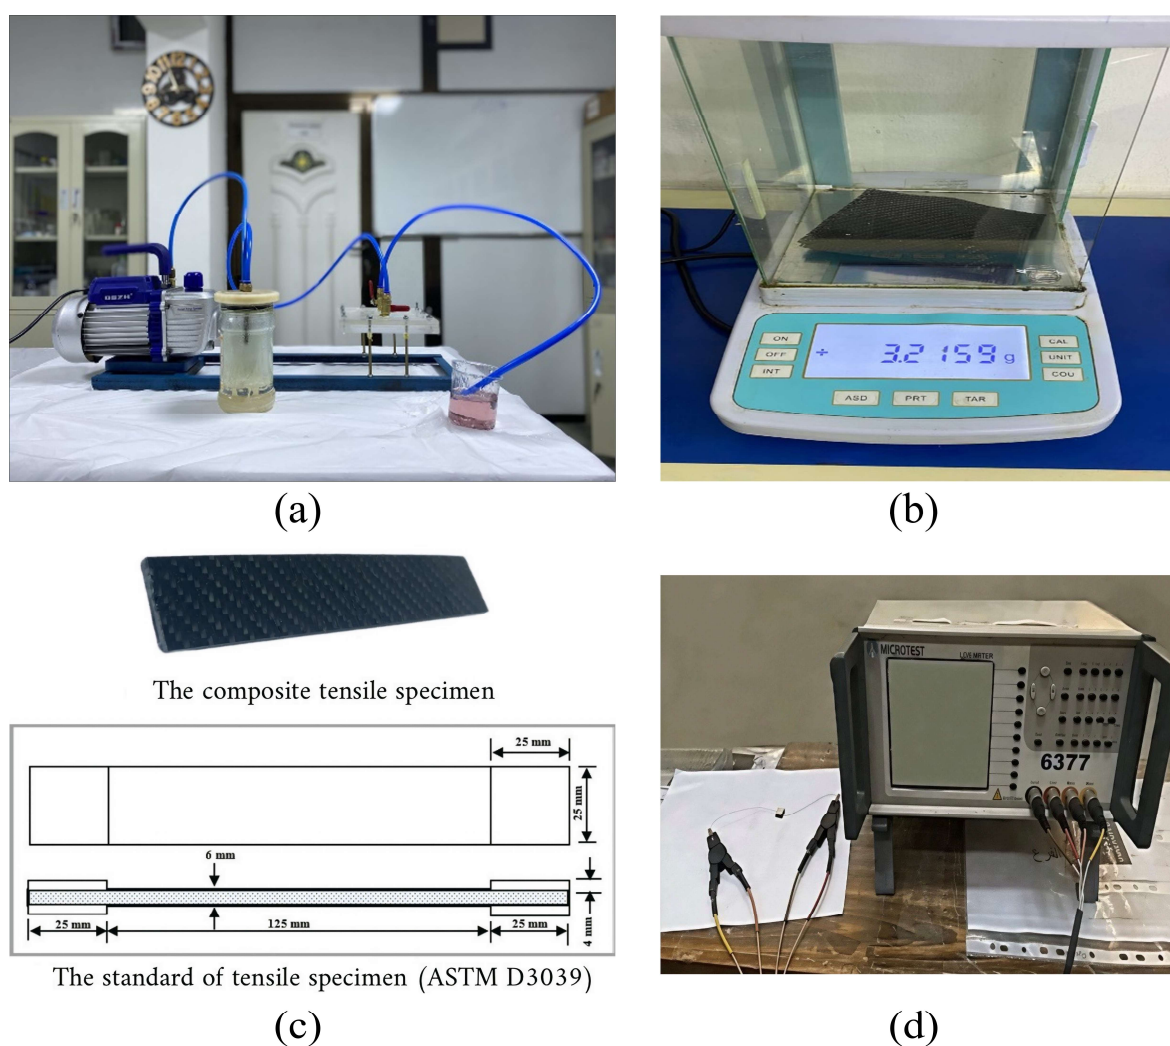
(a) Vacuum casting mold of composite samples; (b) high-precision weighing scale; (c) tensile test specimens; and (d) LCR meter device from Microtest.
